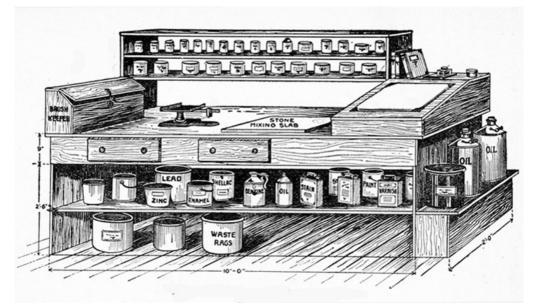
A Handy Paint Mixing Bench Hand Mixer
